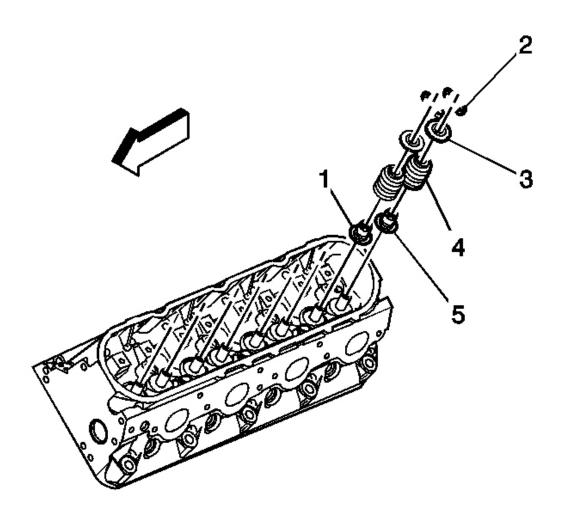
View Of Valve Stem & Valve Spring Components Courtesy of GENERAL MOTORS CORP.
